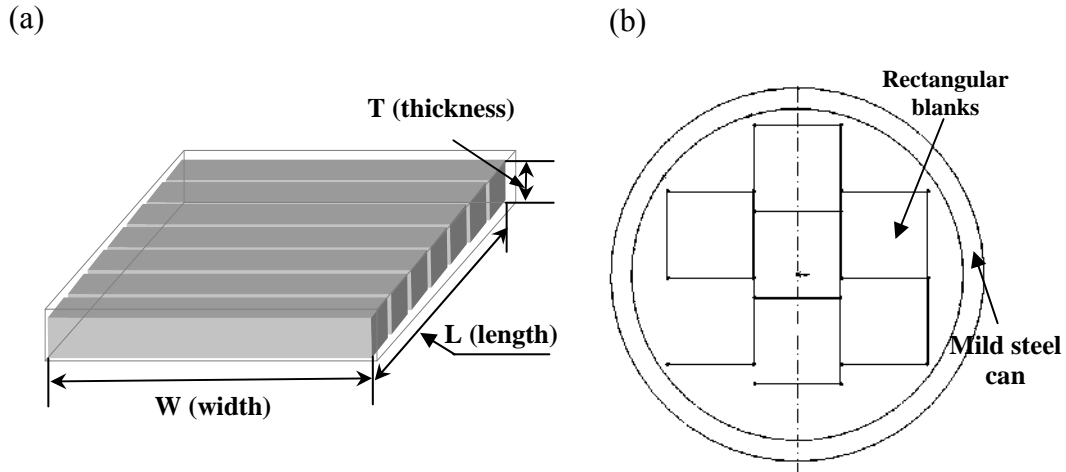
Schematics of machining rectangular blanks for 4-point bending fatigue testing by EDM from (a) flat HIPped plate along the length direction to keep original plate surfaces; (b) cylindrical HIPped bars to produce samples with machined surfaces.
